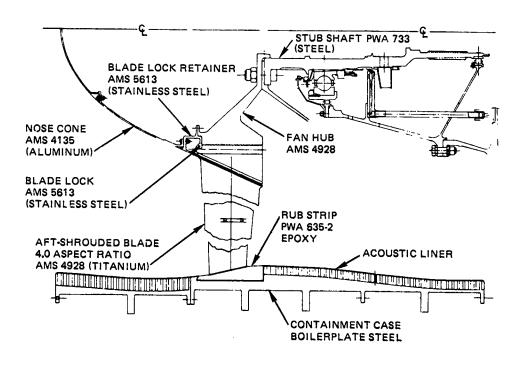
Shrouded Fan Rotor Assembly Materials
